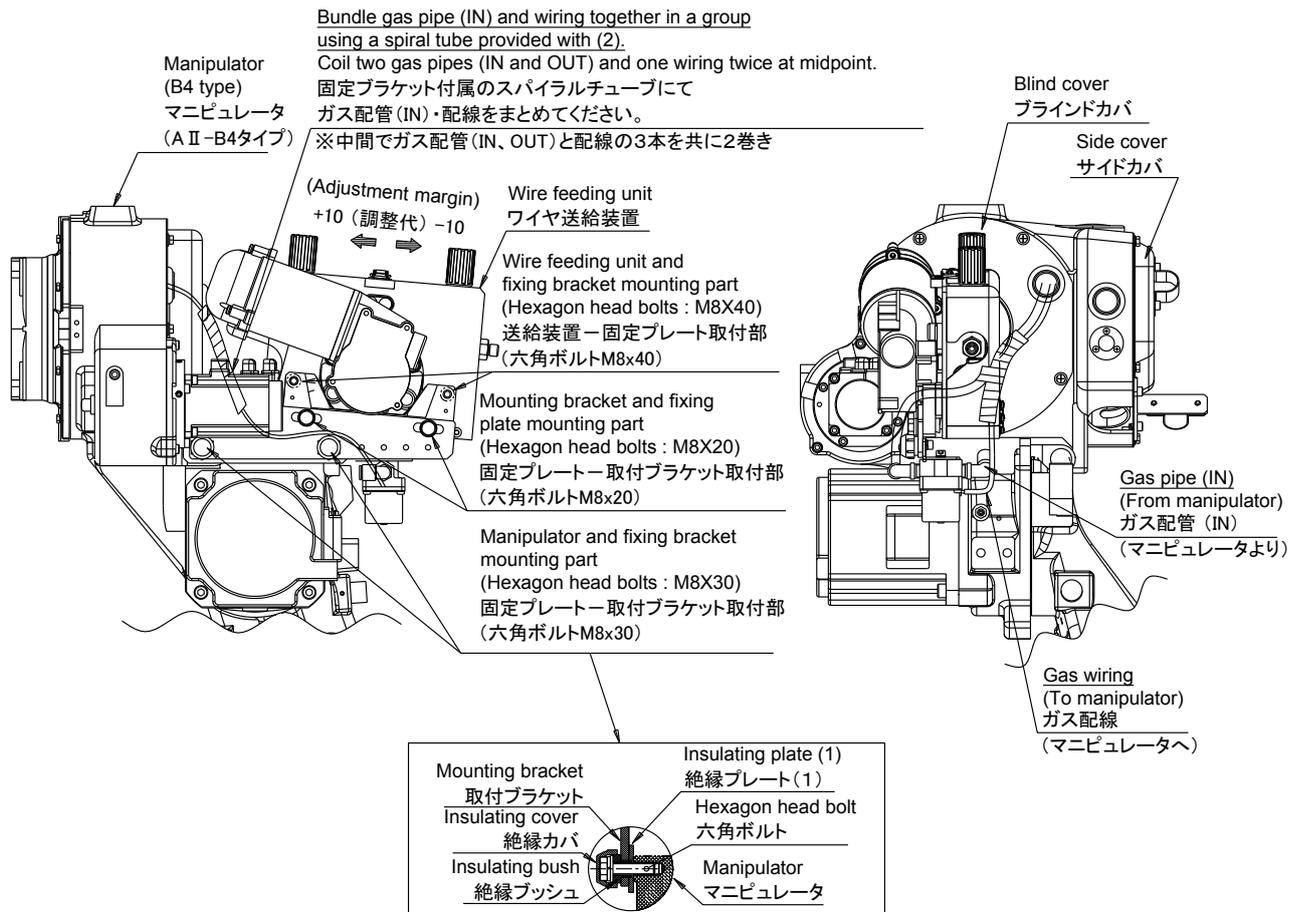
Mounting of manipulator fixing bracket and wire feeding unit (Procedure (7))
